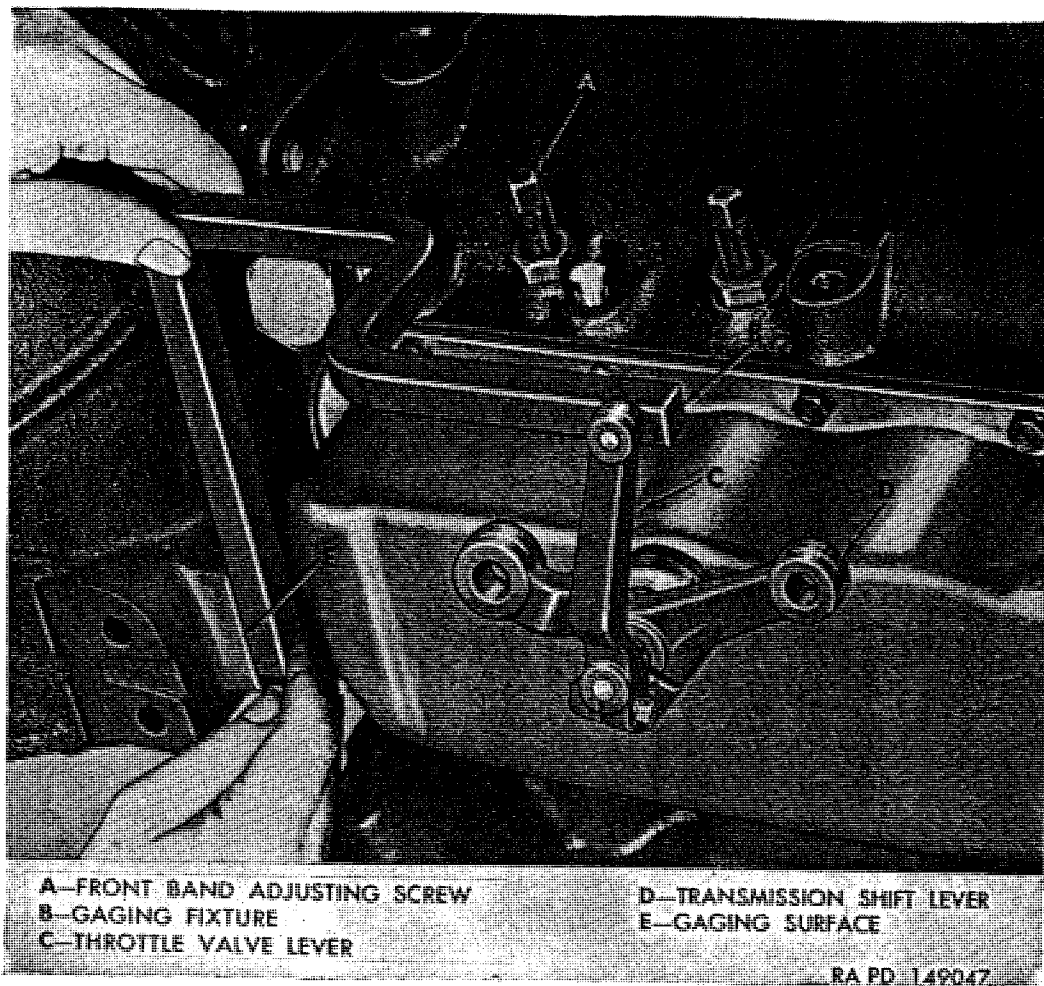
Using gage—B7950168 to adjust throttle valve lever.
